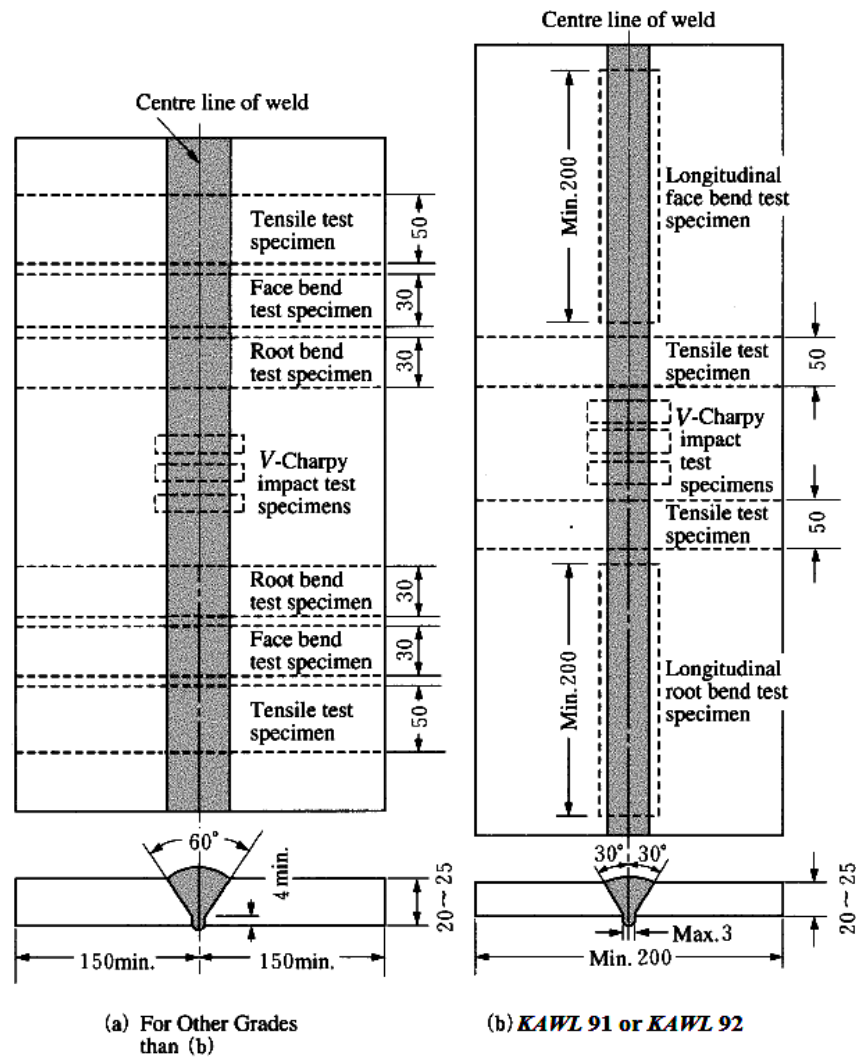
Butt Weld Test Assembly with Two-run Technique (Unit: *mm*, *t* = Plate thickness)
